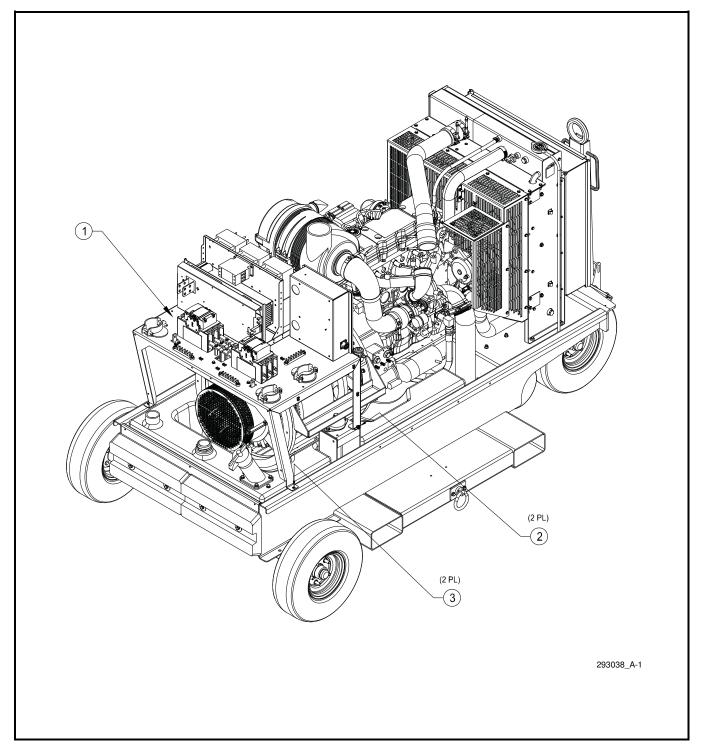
Electrical System Installation, 4400 (Sheet 1 of 3)
